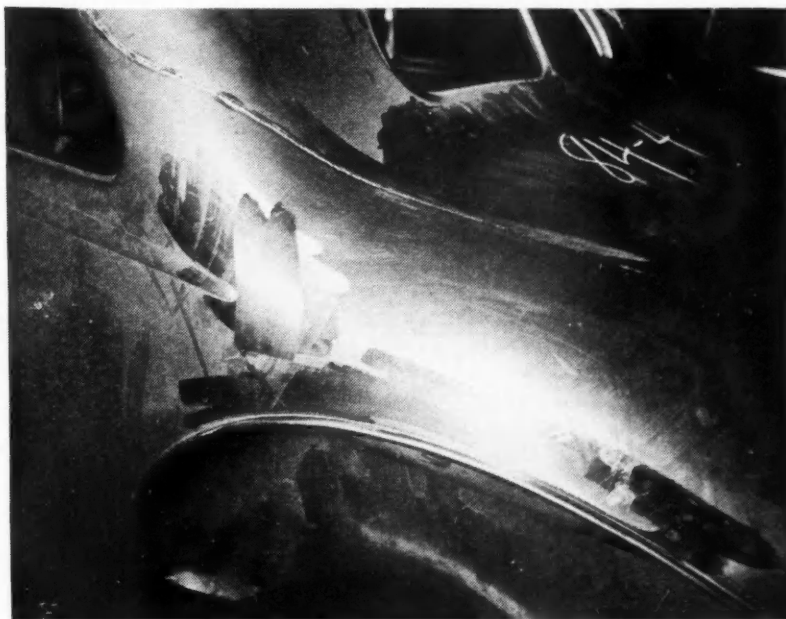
Finished 36-inch electric weld on a Hudson coupe body.
